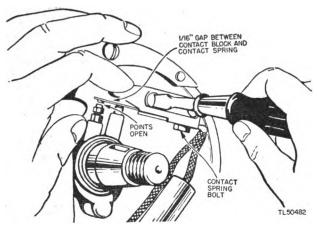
Adjusting contact points on Briggs and Stratton engine magneto.
